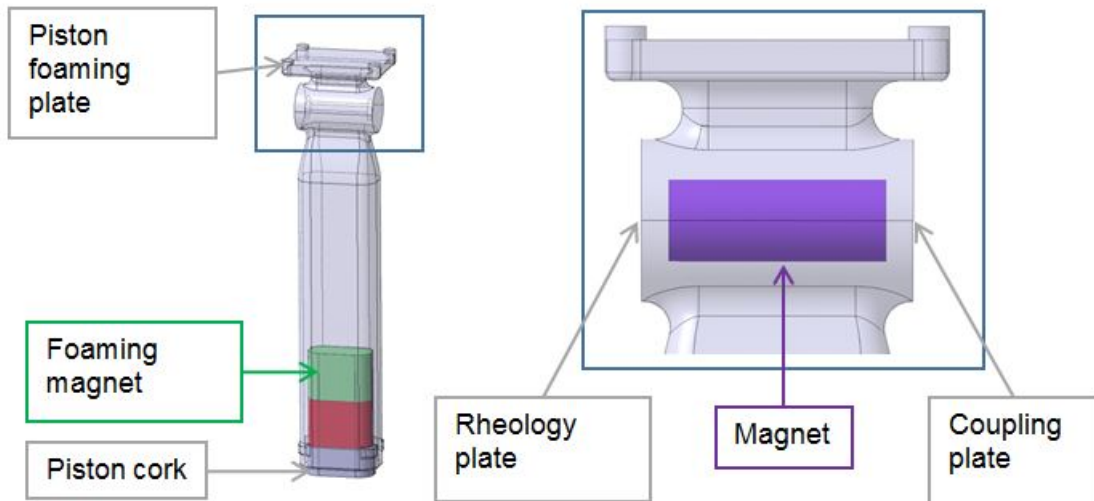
Isometric Front and Zoom View of the Sample Cell Piston Assembly [Calabrese, 2017].
